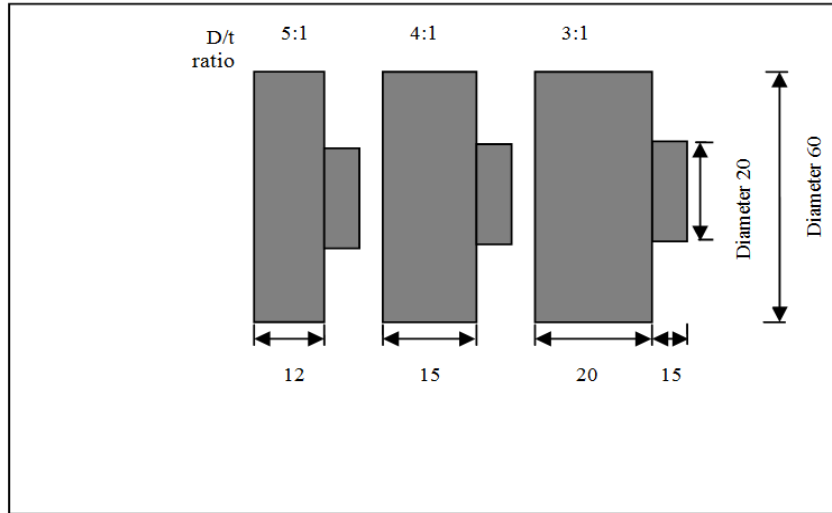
Aluminium-blank casting produced by sand mould casting process
